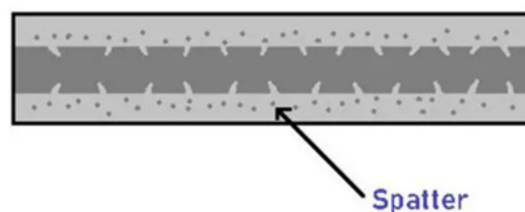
Representing the Spatter in Welding [The Engineers Post].
